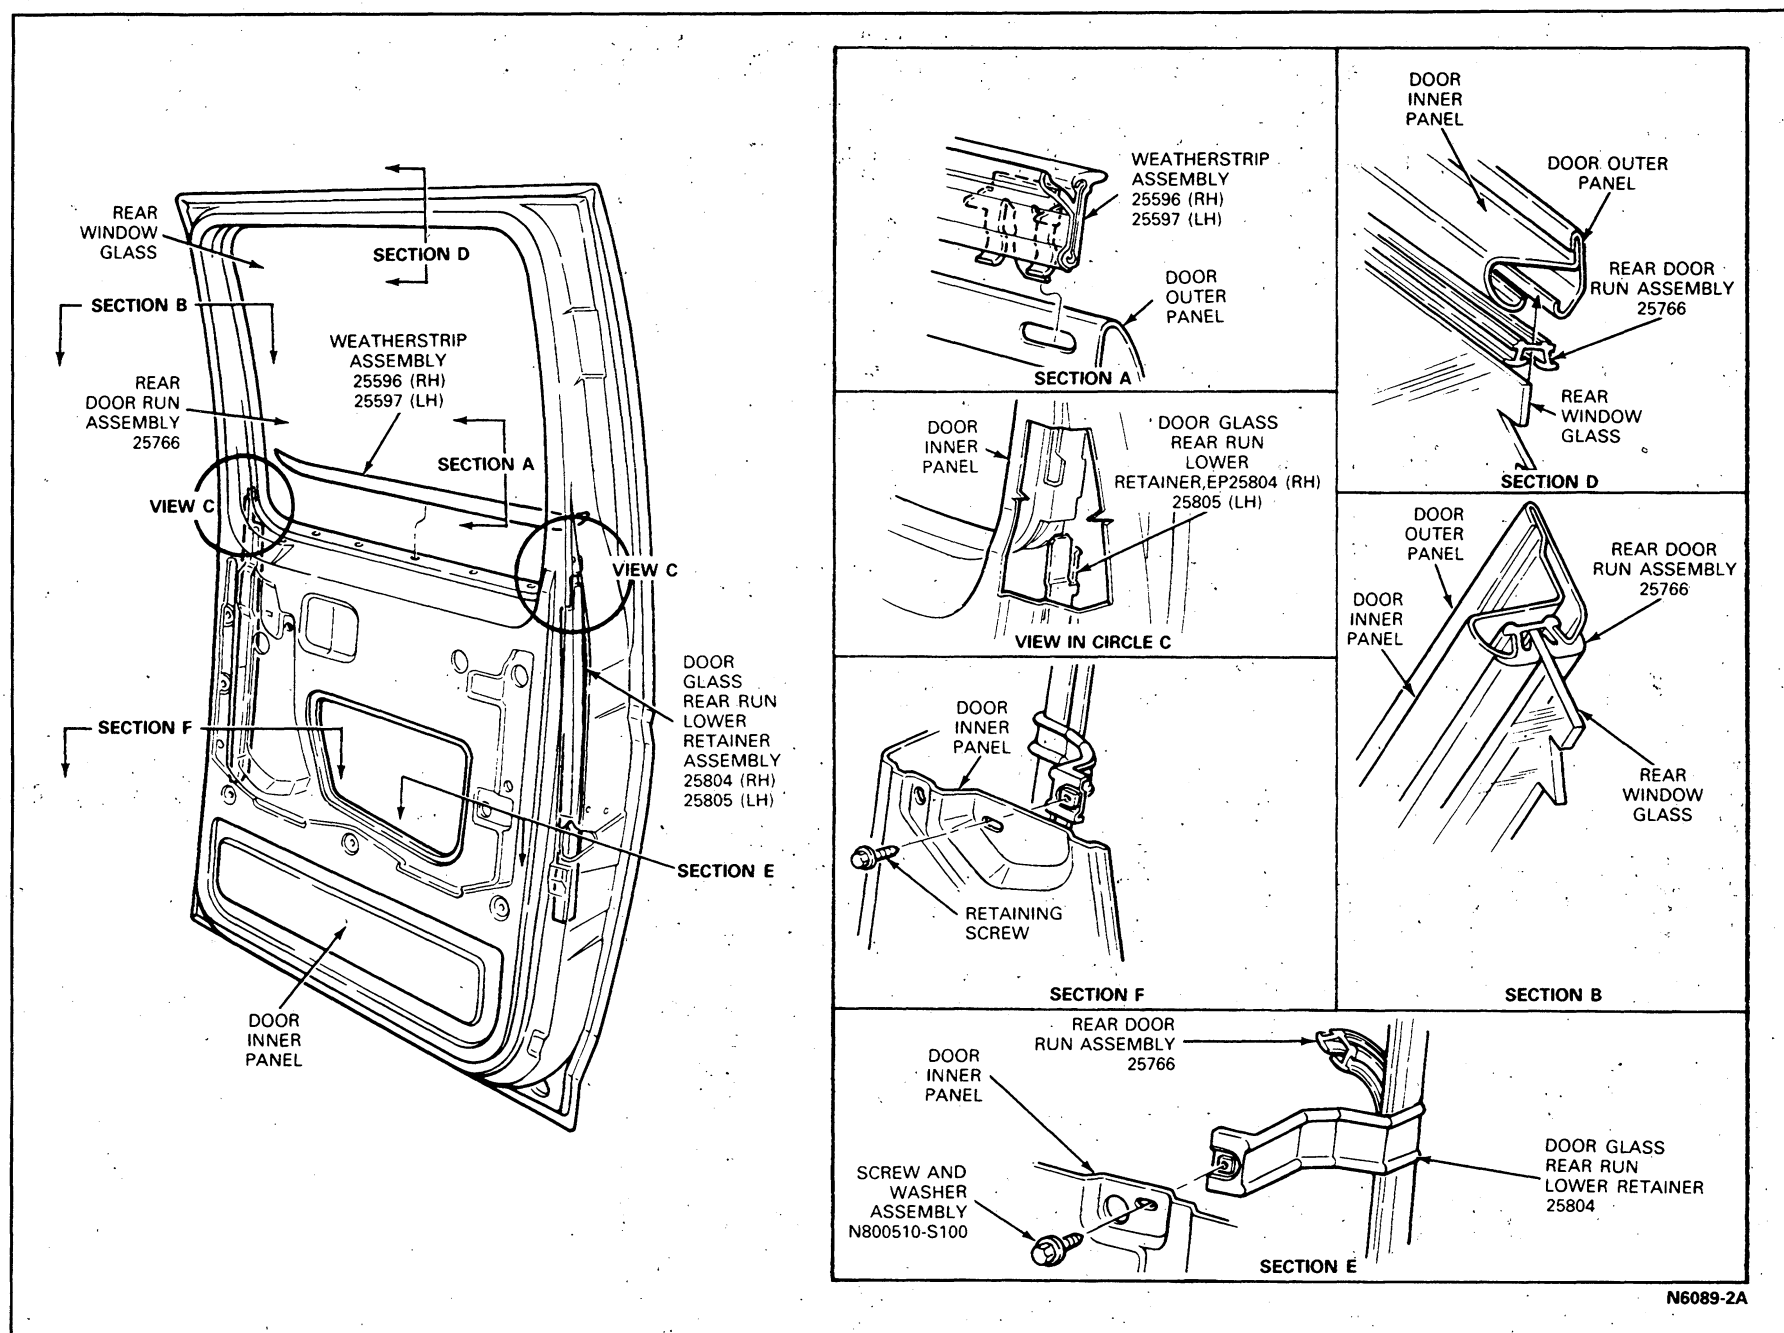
Crew Cab Rear Door Window, Weatherstrips and Retainers
